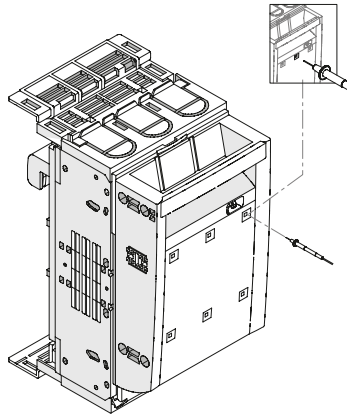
Knockout openings for voltage testing with a test probe, taking size 00 as an example
